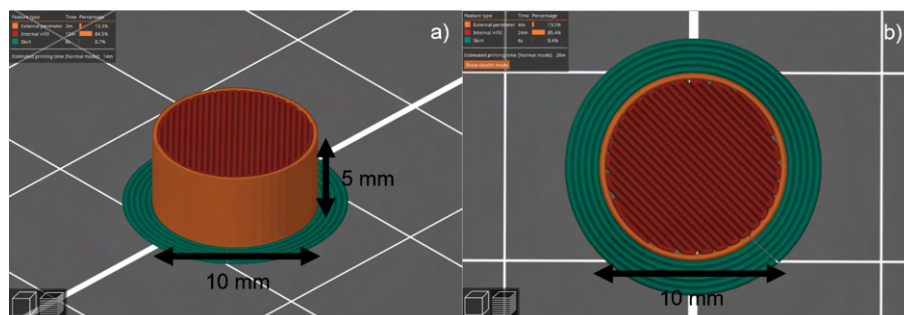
Cylinders dimensions for MEX production: a) isometric and b) top views.
